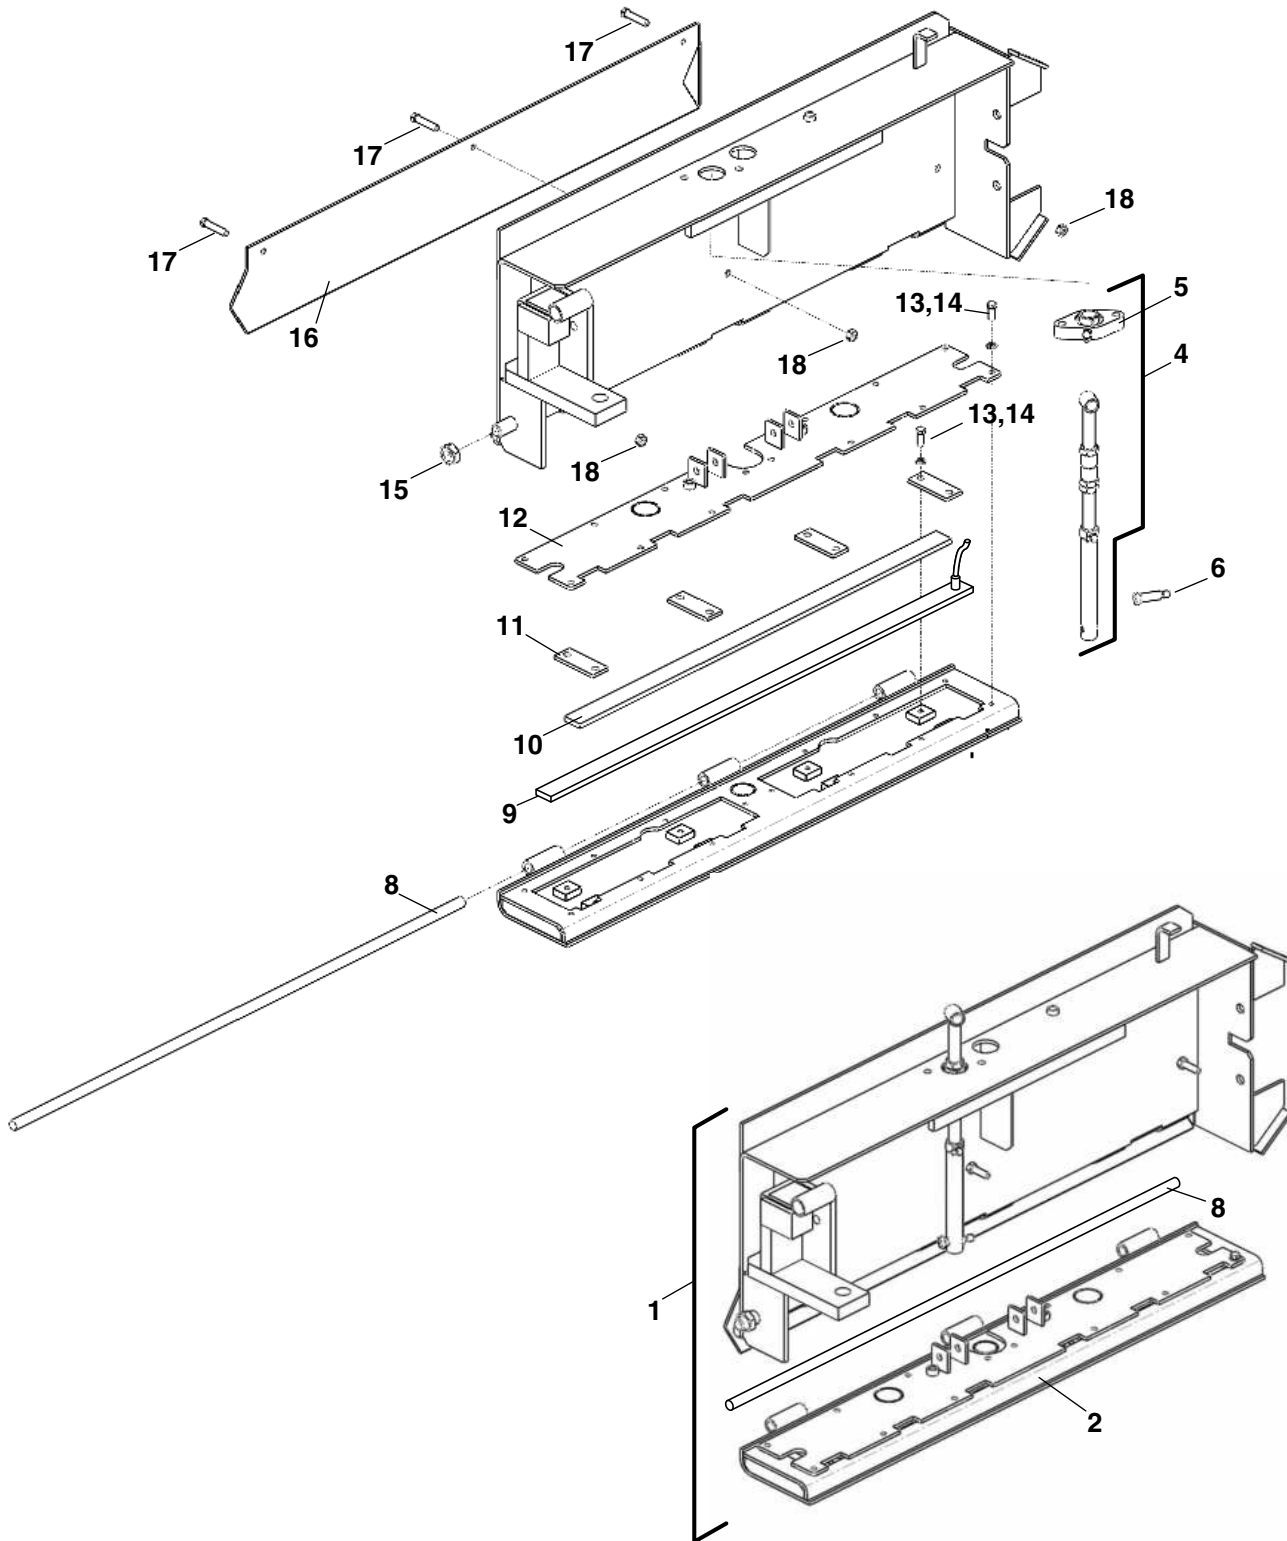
Option - Legend Screed Extension Single Adjust - Left
